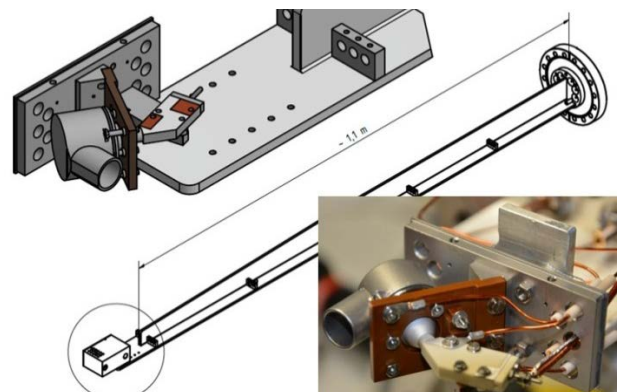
CAD drawings of the detector construction (top left), detector's holder arm (middle) and photo of the detector assembly without protection housing (bottom right).
